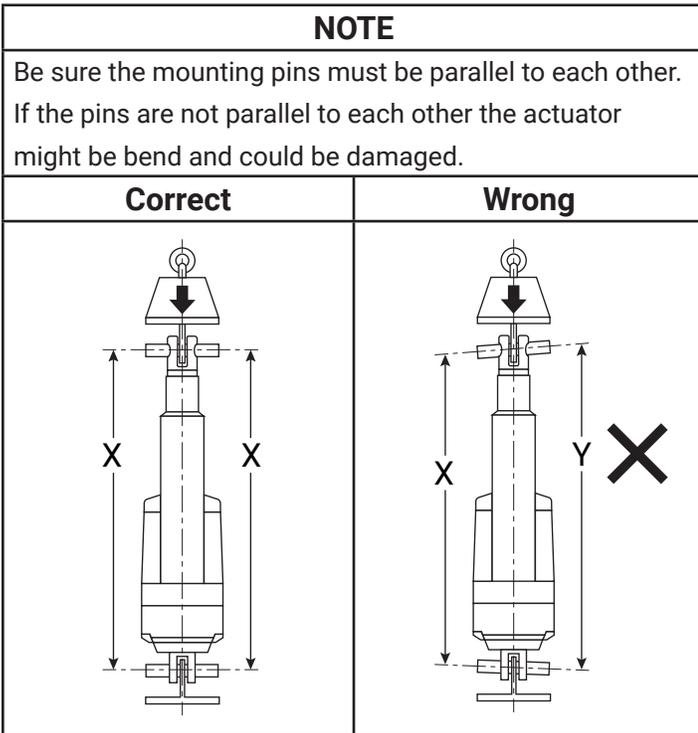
Mounting Pins Must Be Parallel To Each Other.
